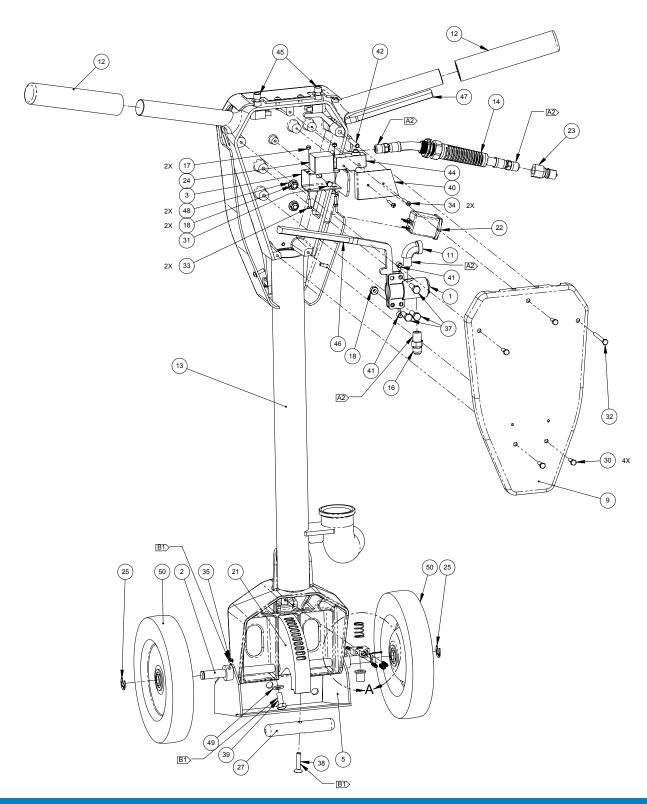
Upper and Lower Handle 220V/60Hz Assembly - View 3 of 3 604-051-205 Rev. B
